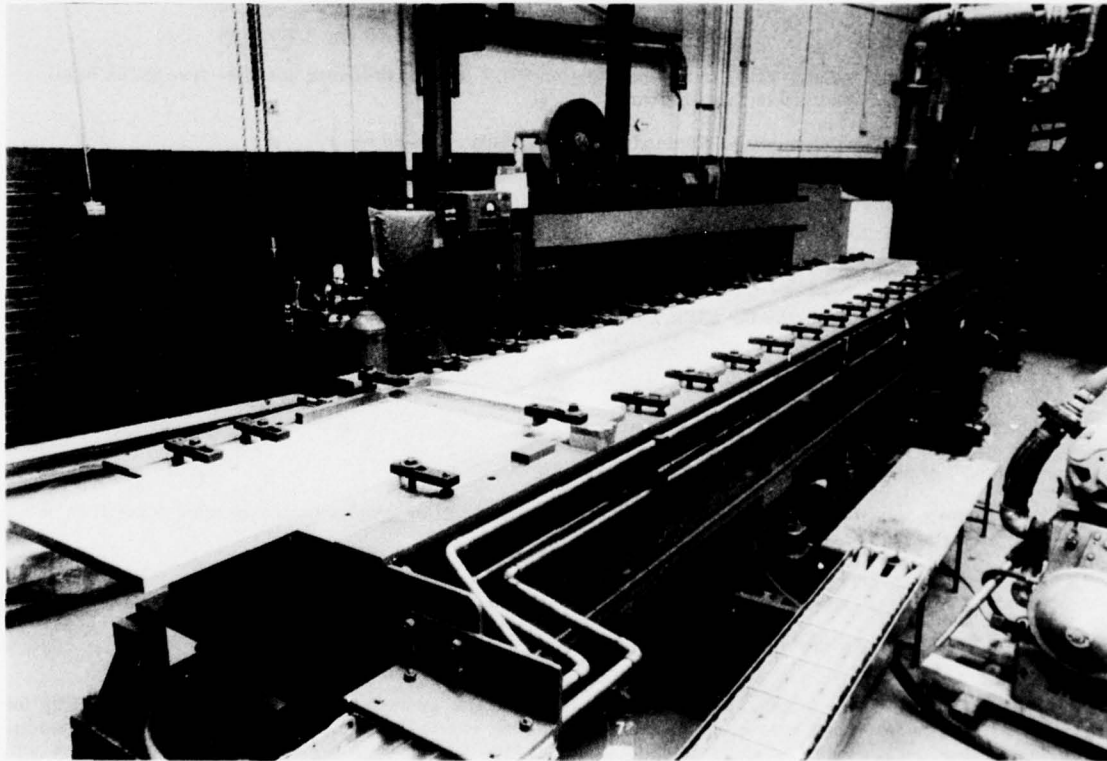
Flat Plate Welding Fixture Setup for 12-ft-long Aluminum Butt Weld
